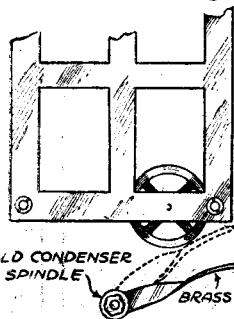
Showing how the brake piece of lever acts on the balance wheel 2BA studing or a
